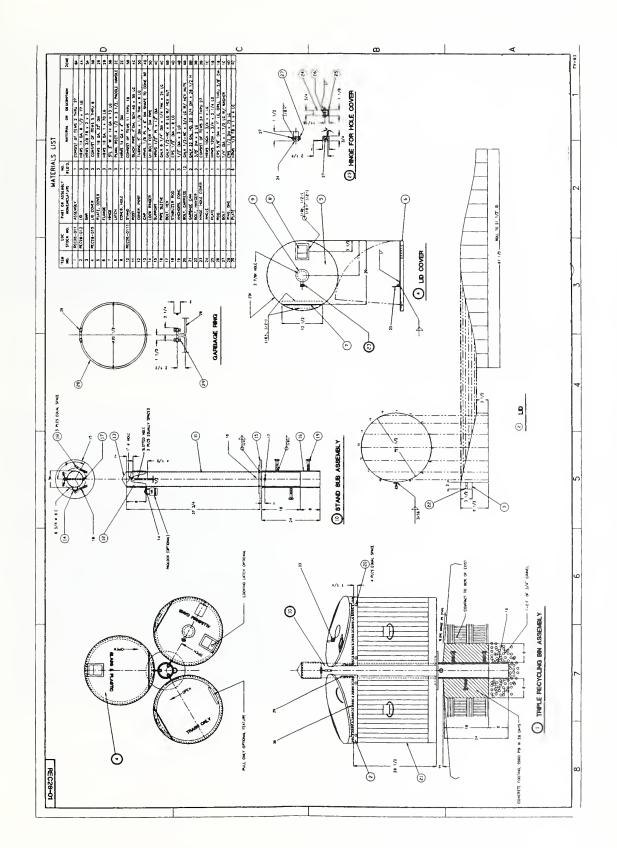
CAD drawing of the Cloverleaf Garbage Container System.
